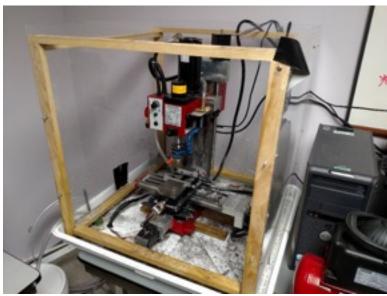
Custom CNC Drill for Aluminum Frame Milling
